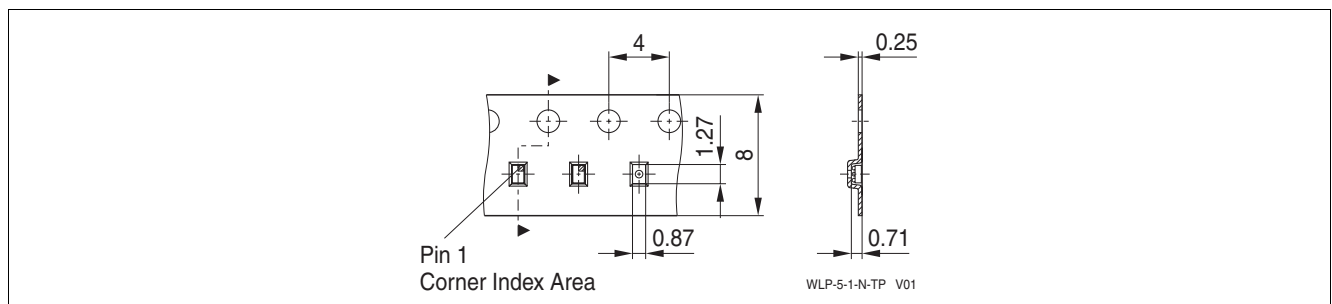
Tape for WLP-5-1 (dimensions in mm)
